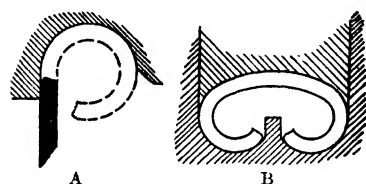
A flat strip double-curved, and a regular curl or false wire, both curling against the burnished edge of the strip with the burr on the inside of the curl.
